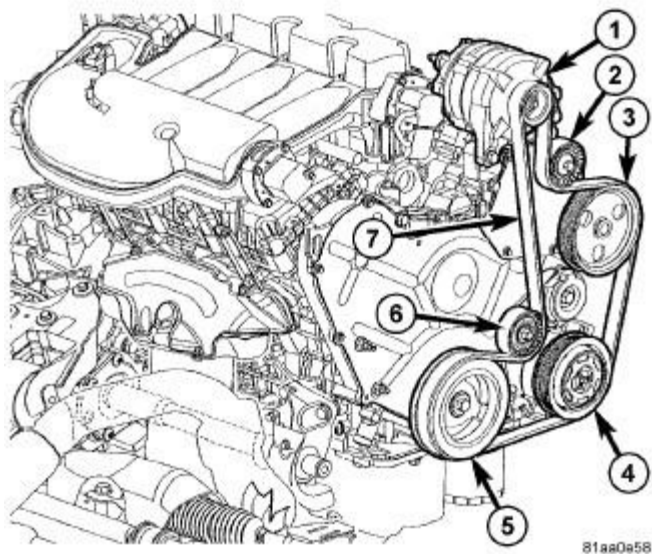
Identifying Accessory Drive Belt & Pulleys
